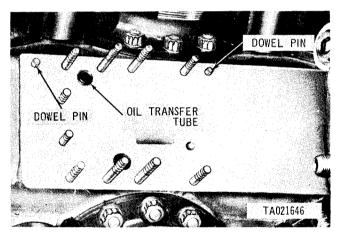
Location ov preformed packing on oil transfer tube in crankcase assembly.
